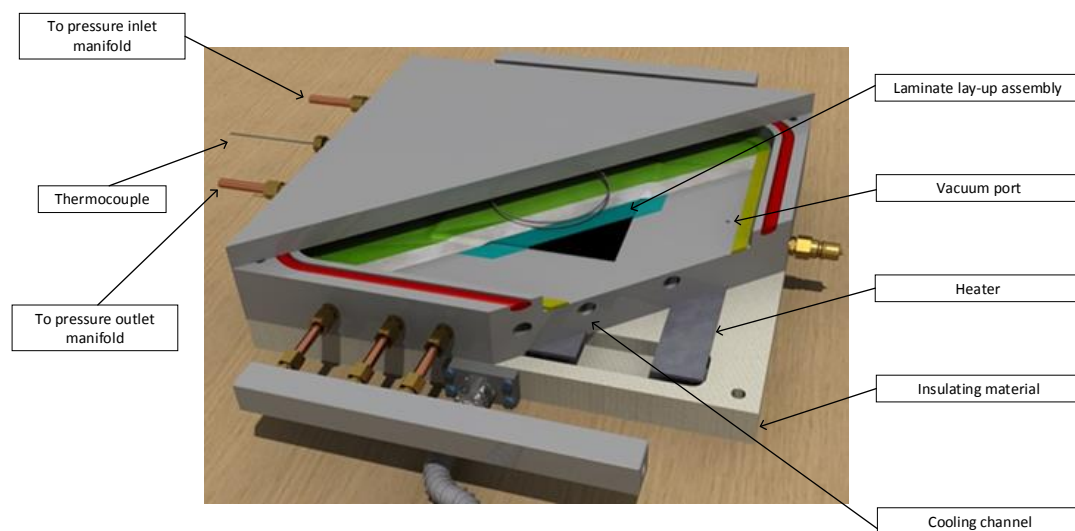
Cut-away of the Pressure Tool showing the laminate lay-up in the cavity, cooling channels and heater bank
